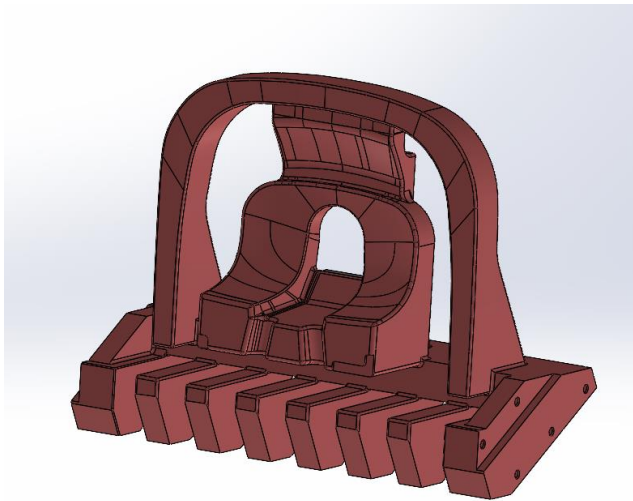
3D model of demoulding support used in the ALS casting cell at the factory.
